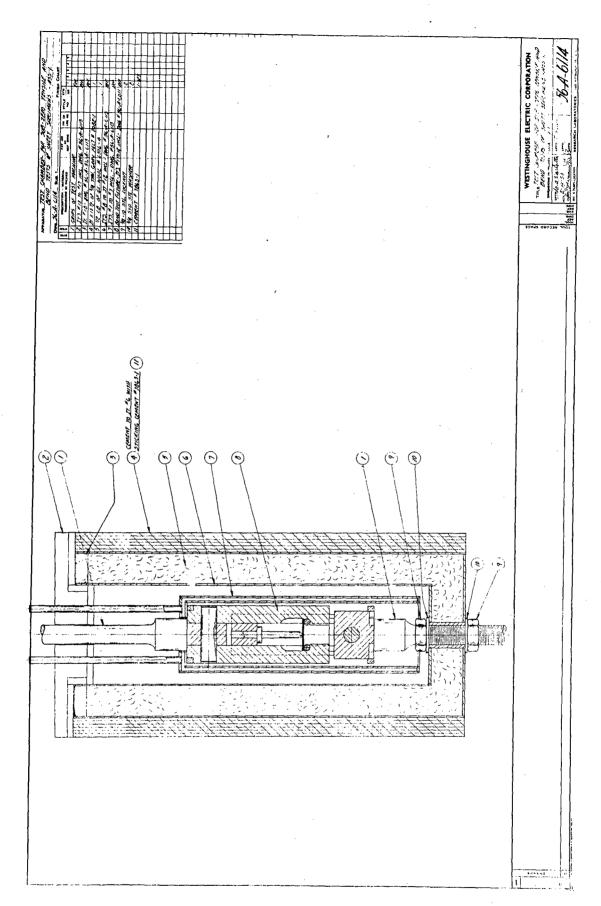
Test Chamber for Sub-zero Tensile and Bend Tests on Sheet Specimens.
